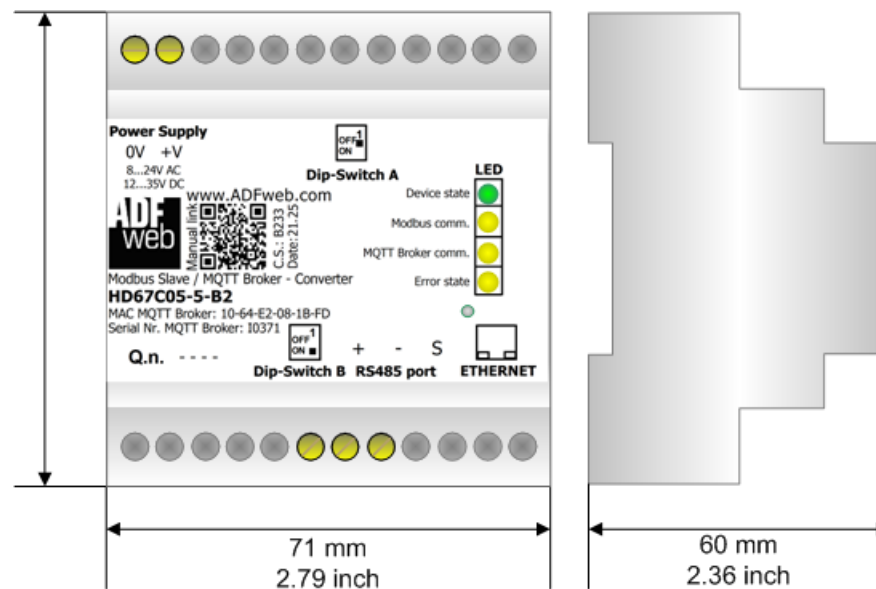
Mechanical dimensions scheme for HD67C05-2-G43-x-xxx-B2
